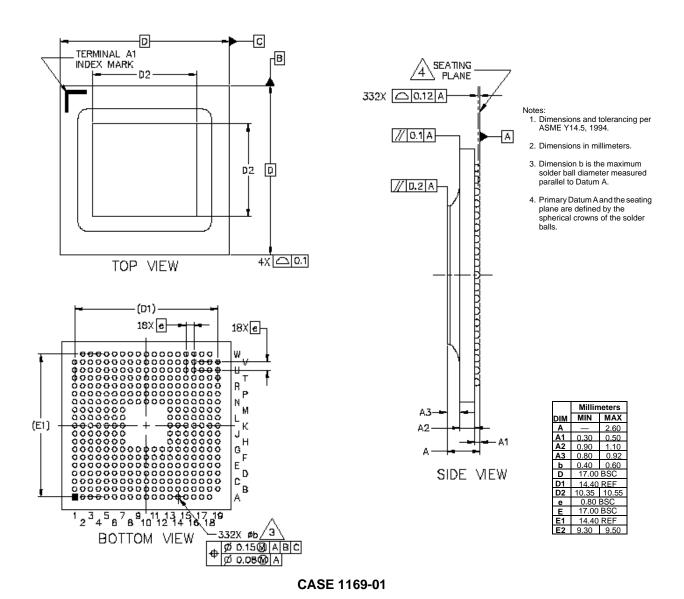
MSC8101 Mechanical Information, 332-pin FC-PBGA Package
